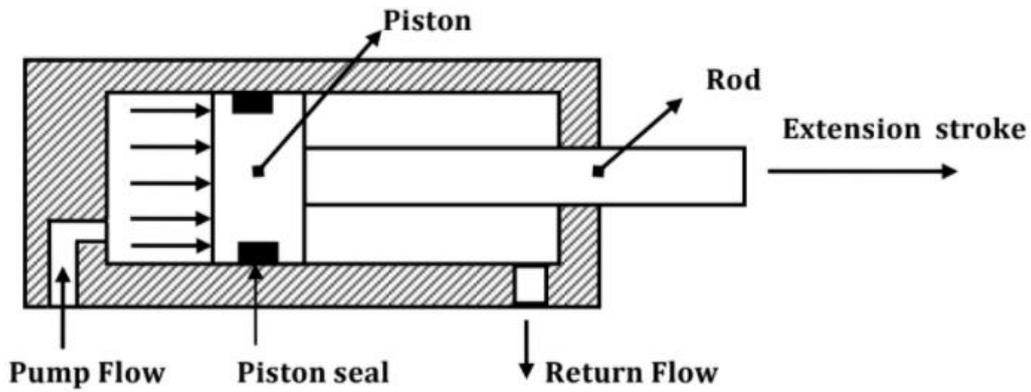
a) Double acting Cylinder with piston rod on one side (Extension stroke)
